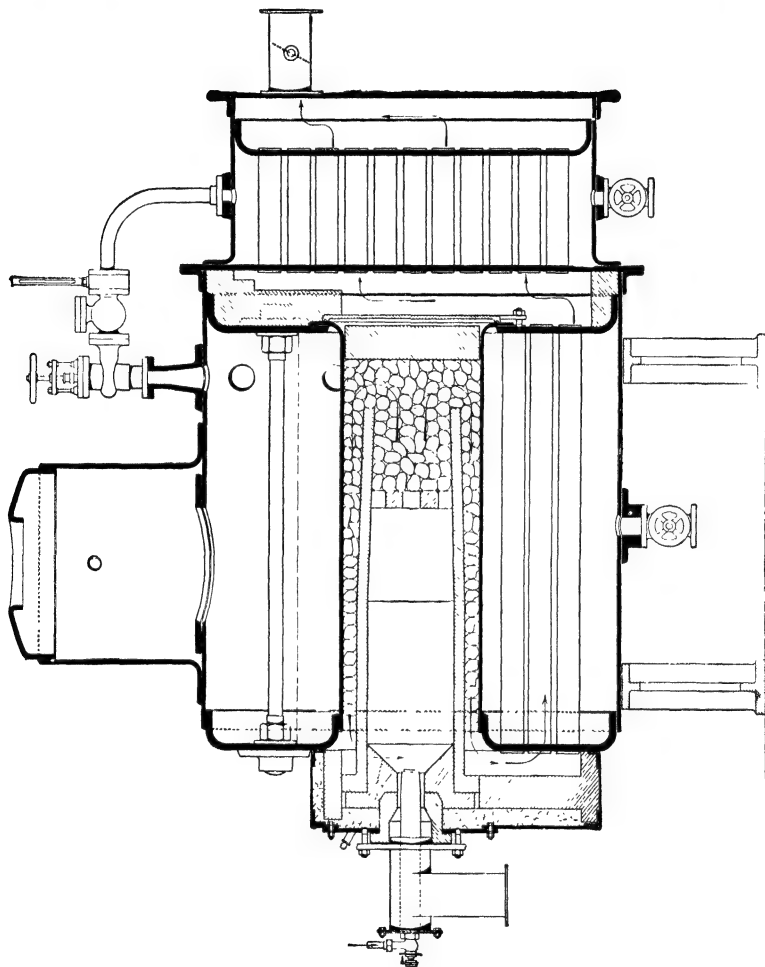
Surface Combustion Boiler (*Bone-Schnabel*)
